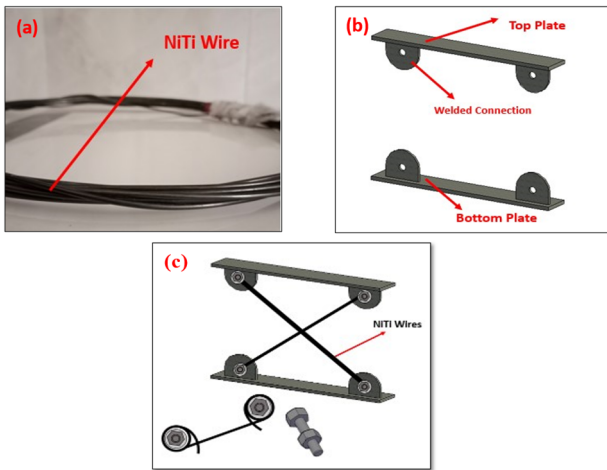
(a) NiTi SMA Wire sample; (b) Top and Bottom plates fabricated to hold the SMA wires; (c) Diagonal arrangement for SMA wires
